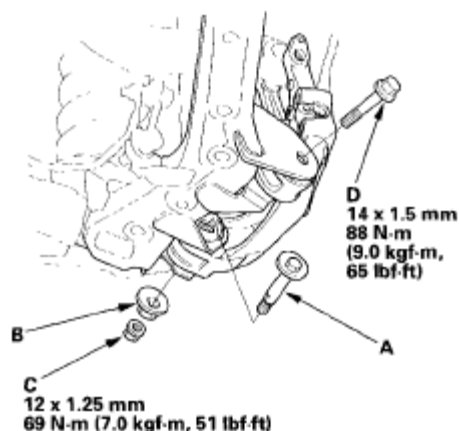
Identifying Adjusting Bolt, Cam And Self Locking Nut (With Torque Specifications)
